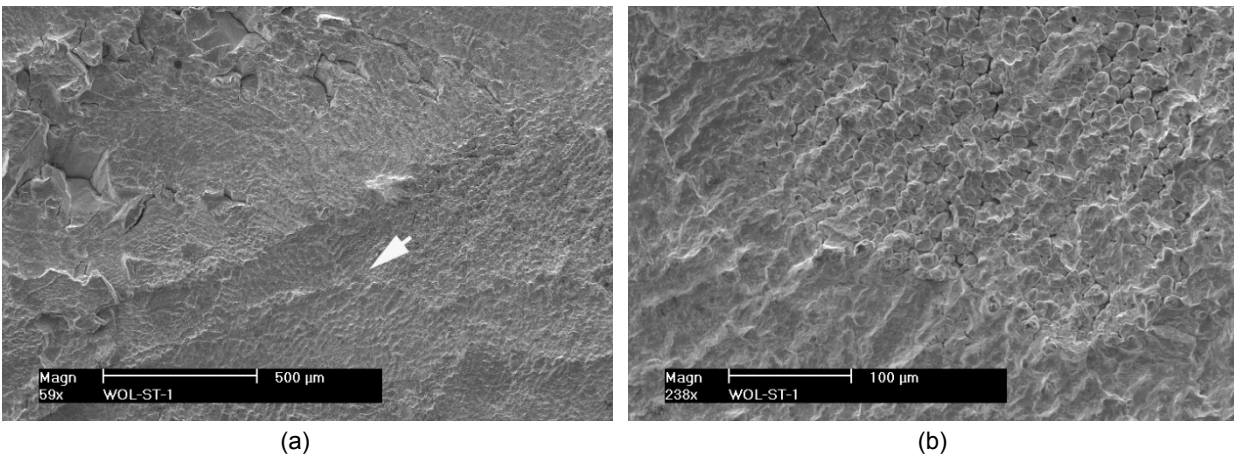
Fracture surface of specimen WOL-ST-1 at (a) locations 6 in Fig. 3-35, and (b) detail at the white arrow in (a). Crack advance is from bottom to top.
